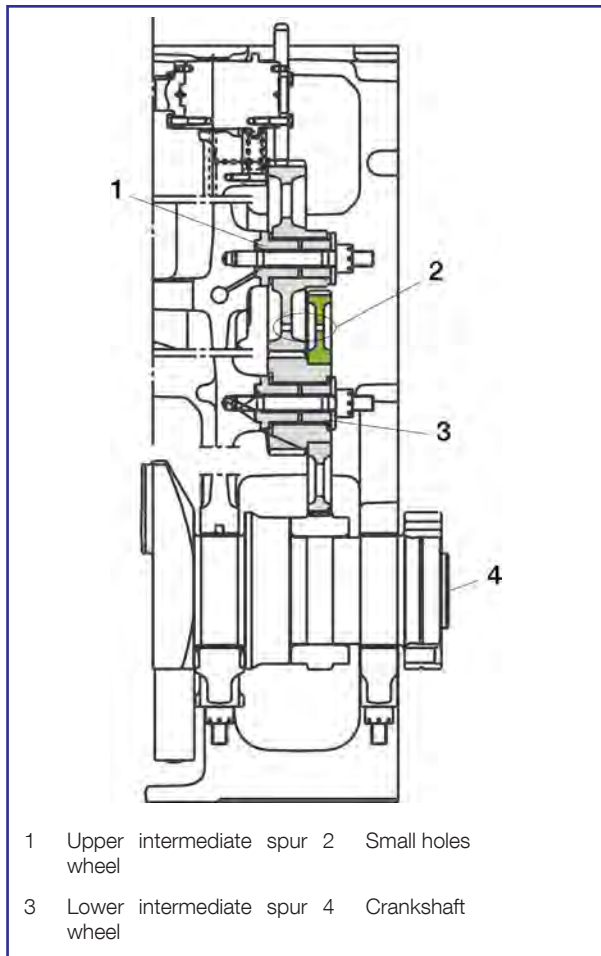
Position of small holes in the circumference of the two intermediated gearwheels
